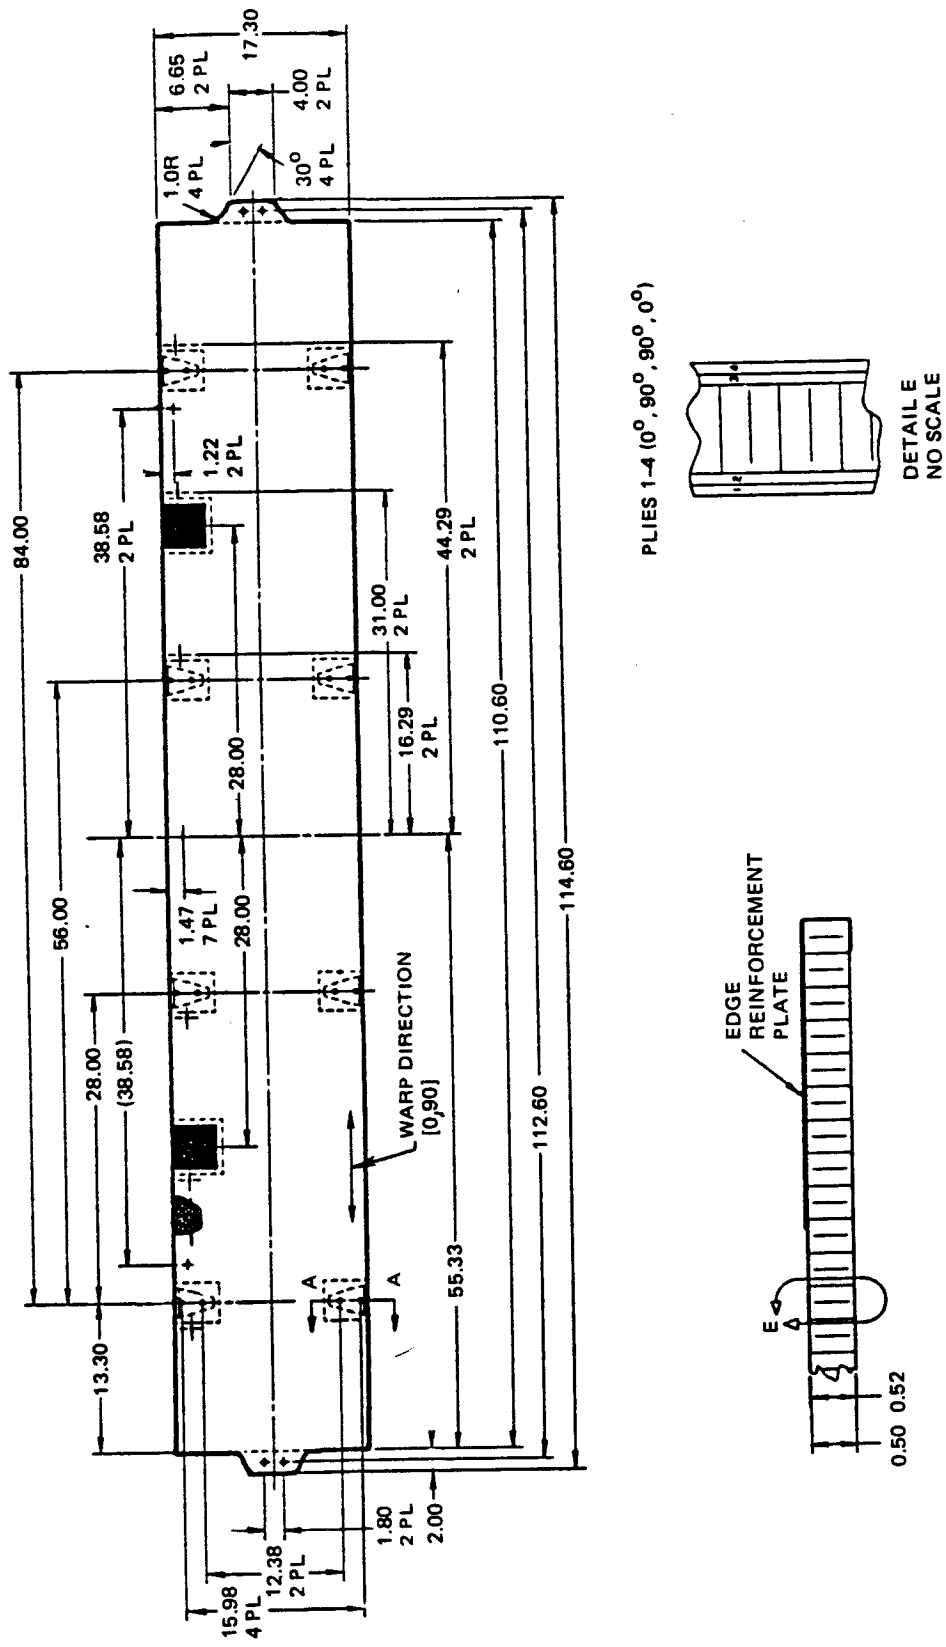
Blanket Housing Lid Panel Assembly Structure GY70
